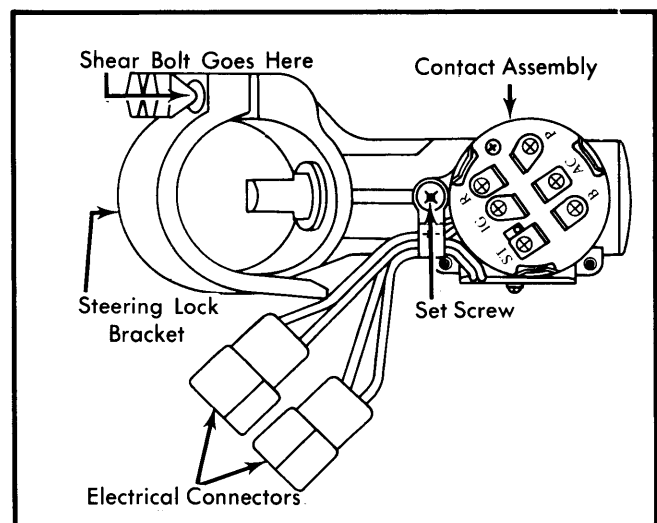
Exploded View of Ignition Switch Assembly (Except B2000)
